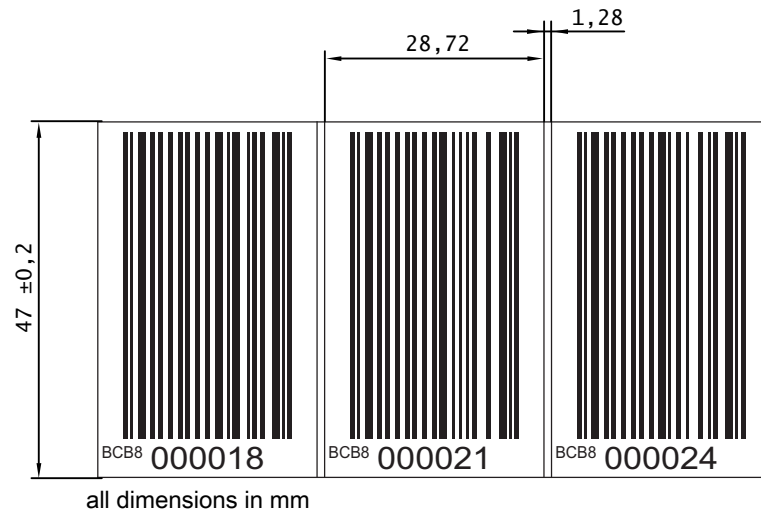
Dimensioned drawing bar code tape BCB8 with 30 mm grid
